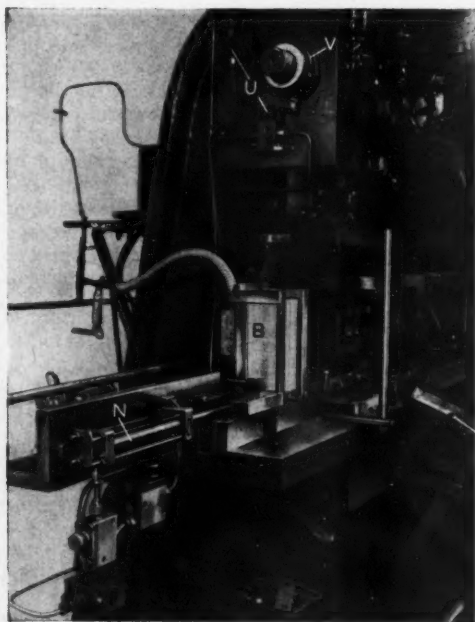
A view from the left-hand end of the special press, showing the magazine of the Adrema multi-stage tool, also the air cylinder for operating the shuttle bar that feeds blanks and transfers workpieces from one station to another
